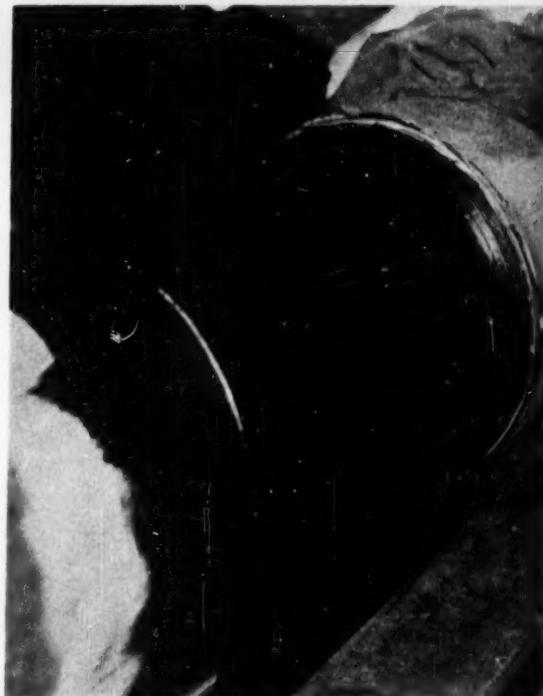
APPEARANCE OF 2-FT SECTION OF UNCURED SYNTHETIC RUBBER SHEET IN WAY OF A WATER-LUBRICATED BEARING JOURNAL ON AN AIRCRAFT-CARRIER PROPELLER SHAFT
